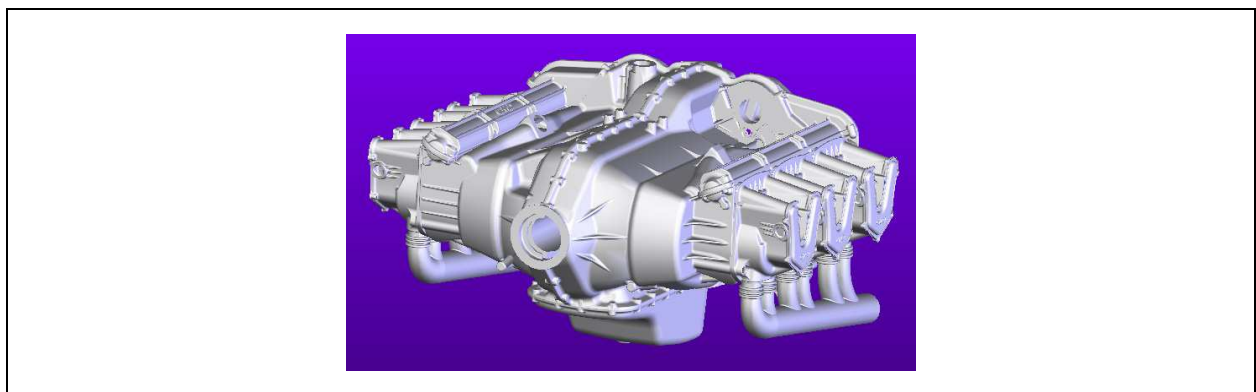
3D cad view of the 6 cylinder, two-stroke Diesel engine.
